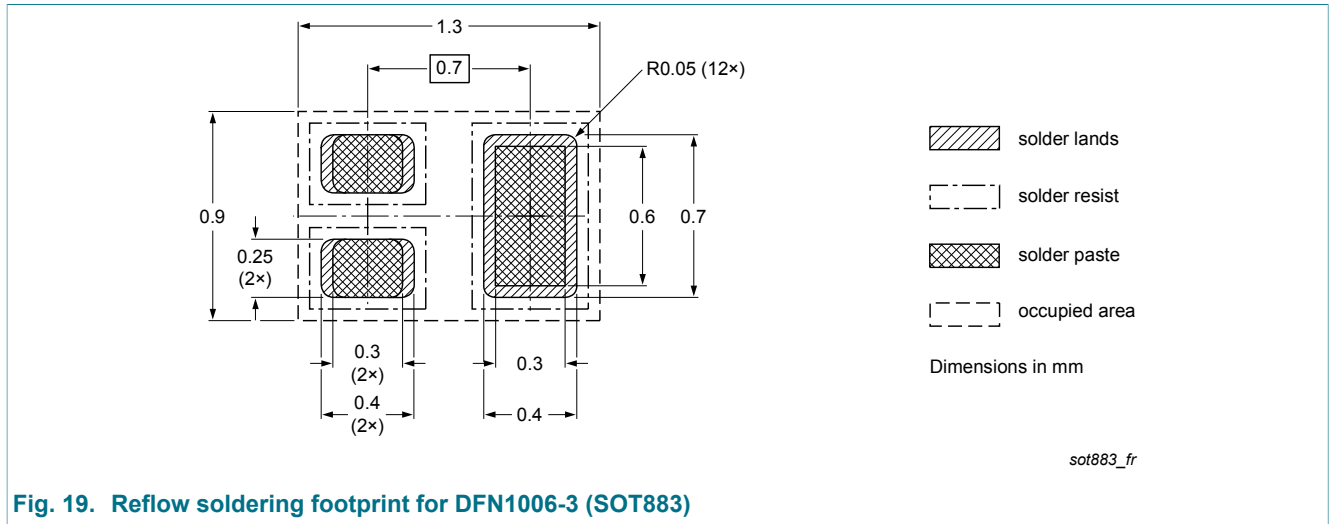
Reflow soldering footprint for DFN1006-3 (SOT883)
